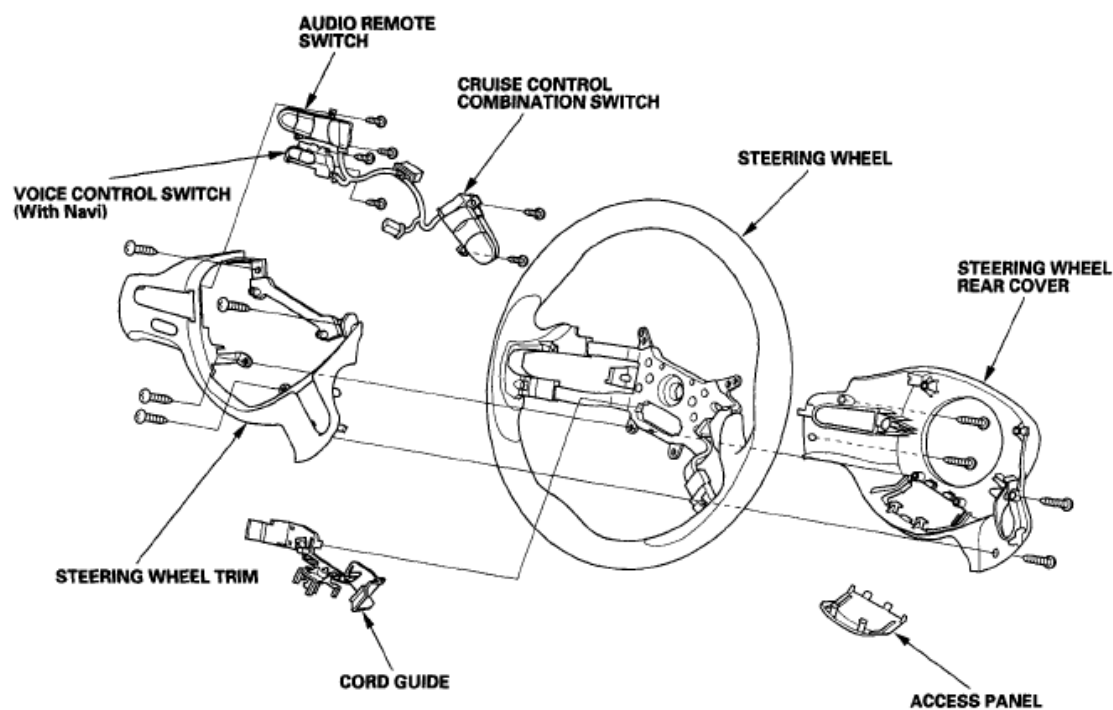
Exploded View Of Steering Wheel - Except Si Model
